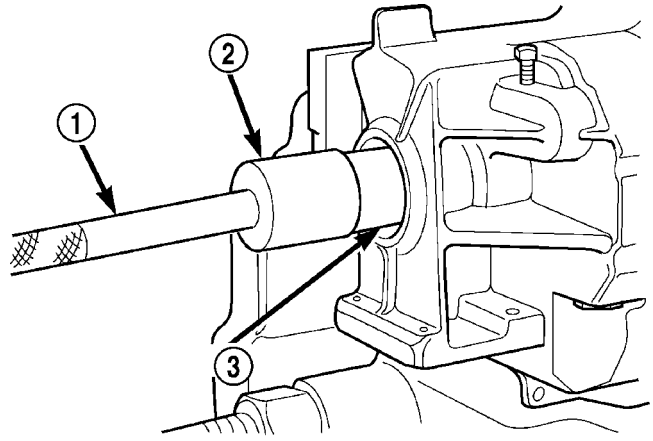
EXTENSION HOUSING BUSHING REMOVAL
